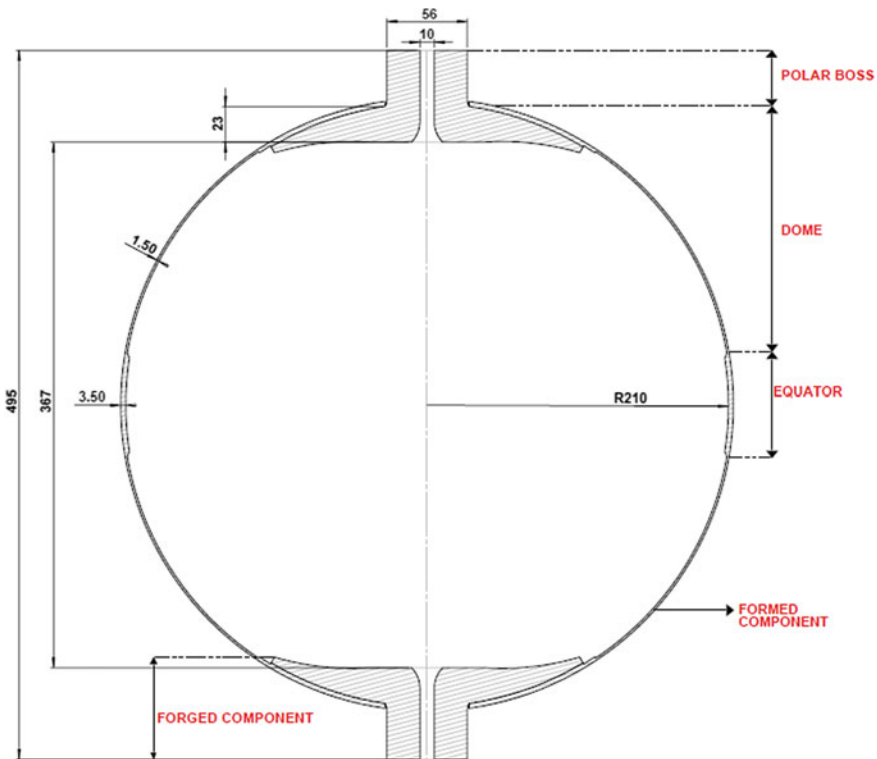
Pressure vessel liner configuration (dimensions in mm)
